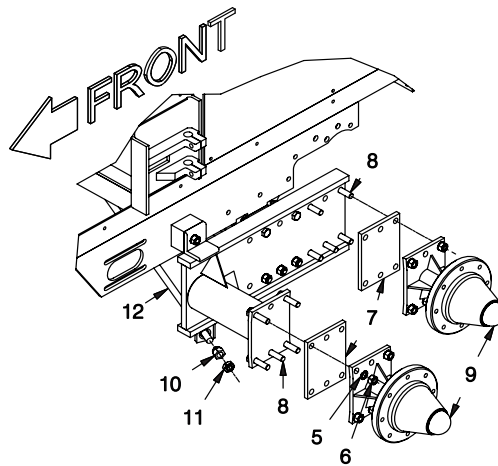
Mounting Spacer Plates, Hubs & Truss Rod
